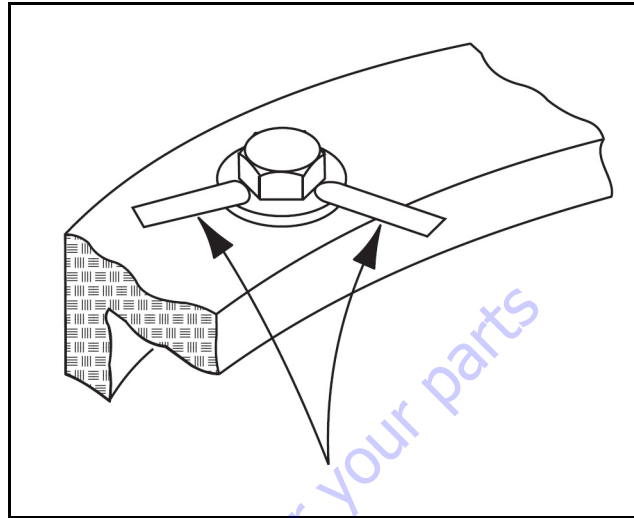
Swing Bearing Bolt Feeler Gauge Check
